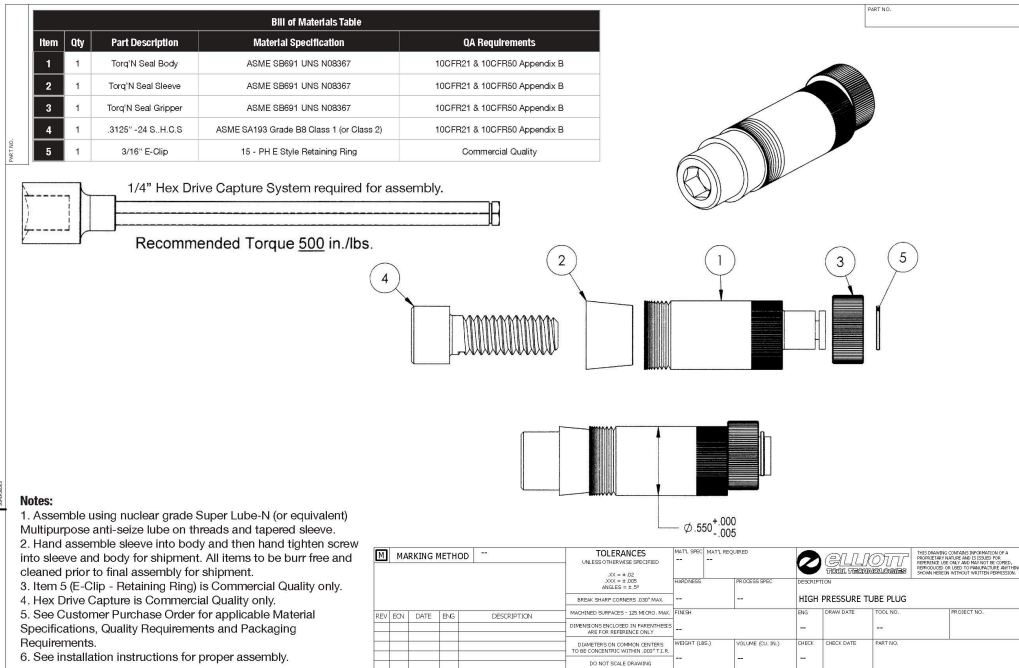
Torq N' Seal<sup>®</sup> Assembly Drawing
